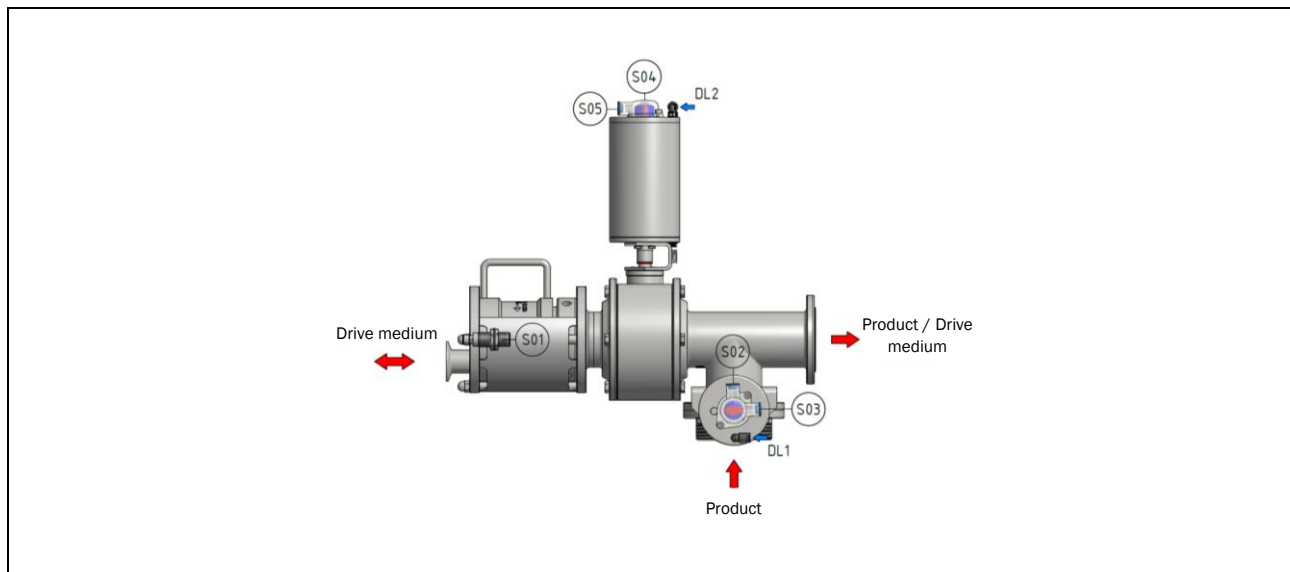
Switching states of Plug-in Chamber with Ball Valve and Butterfly Valve
